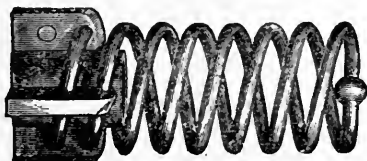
SPIRAL SPRING FOR CROSBY INDICATOR.
